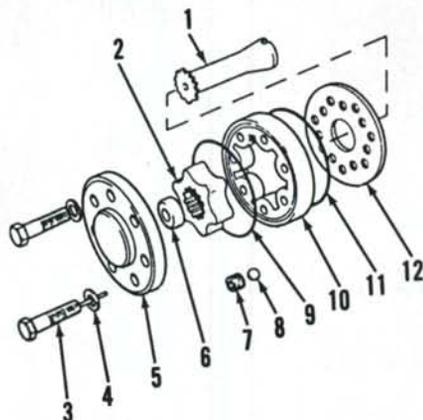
Exploded view of steering valve rotor set, drive shaft and related parts.
